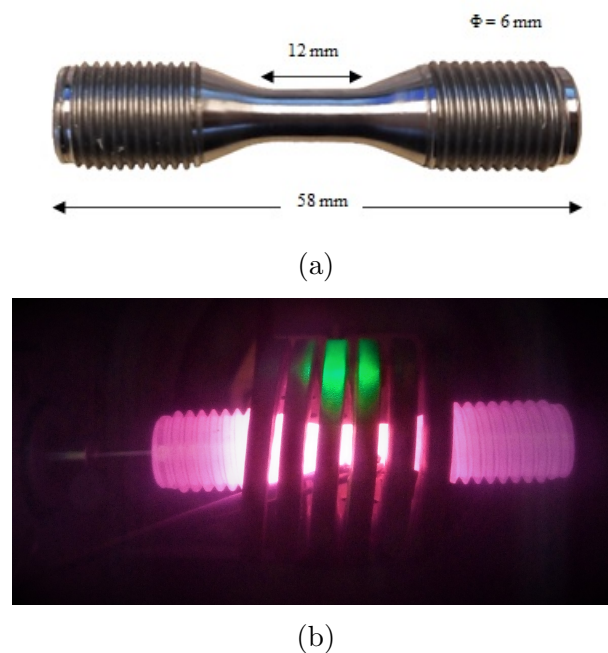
(a) Fatigue specimen design and (b) fatigue specimen glowing in the dilatometer during heat treatment.
